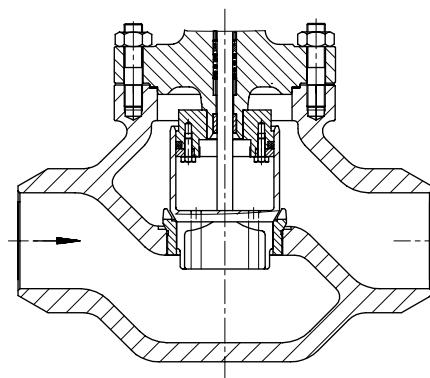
· Type 3251 Globe Valve with welding ends and
